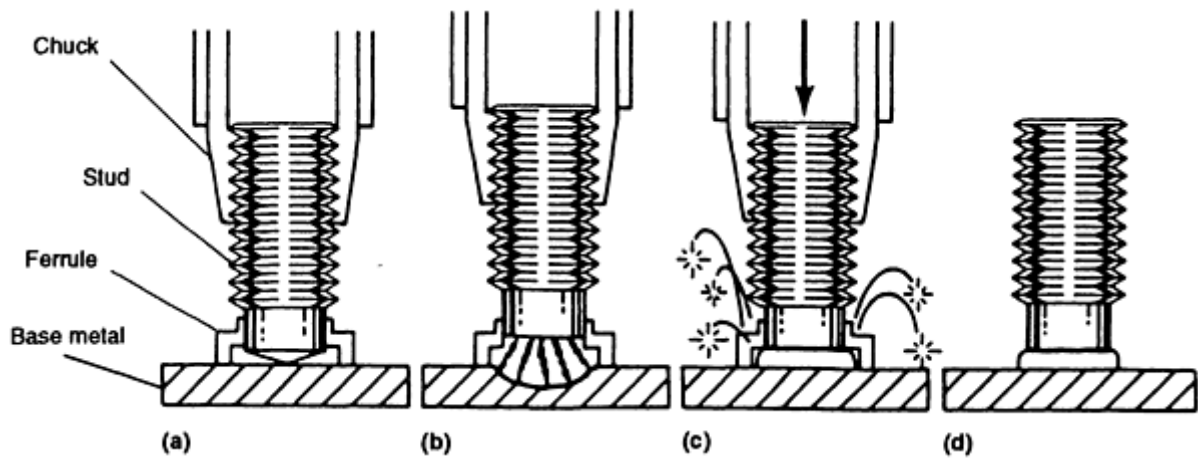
STUD ARC WELDING PROCESS. (A) GUN IS PROPERLY POSITIONED. (B) TRIGGER IS DEPRESSED AND STUD IS LIFTED, CREATING AN ARC. (C) ARCING PERIOD IS COMPLETED AND STUD IS PLUNGED INTO MOLTEN POOL OF METAL ON BASE MATERIAL. (D) GUN IS WITHDRAWN FROM WELDED STUD AND FERRULE IS REMOVED.
